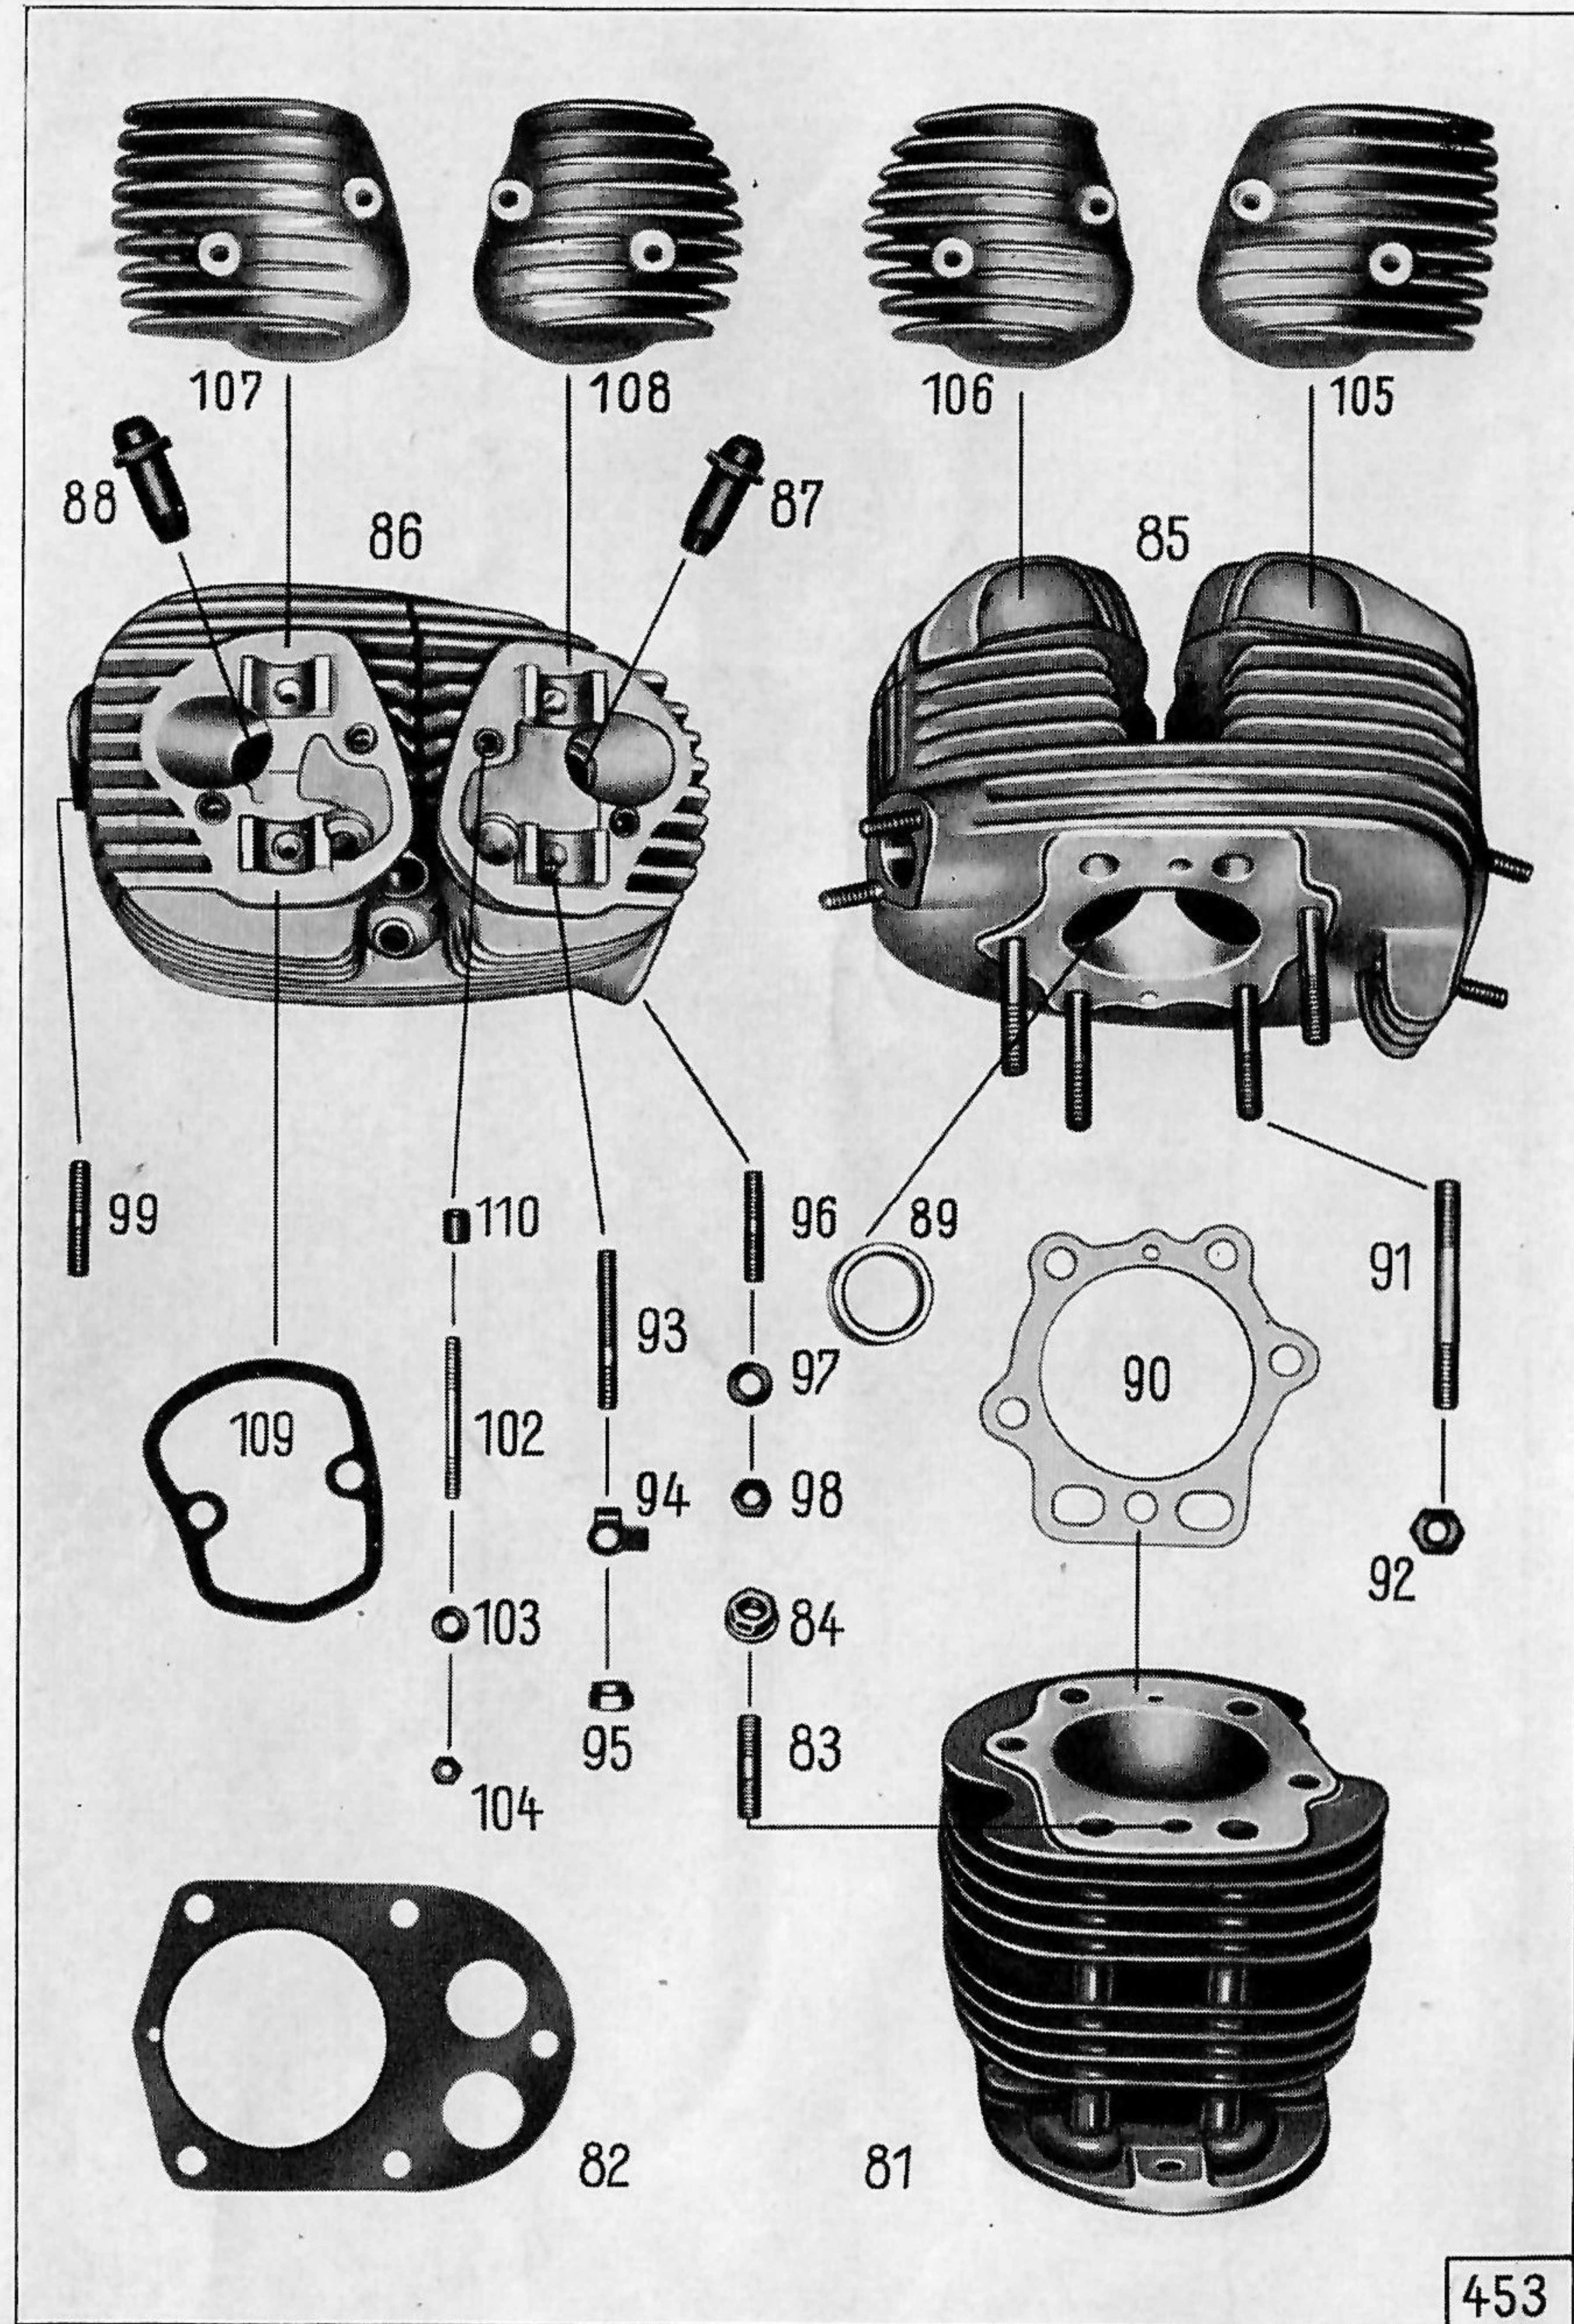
, Group M: b) Housing and Cylinders, Cylinder and Cylinder Head
